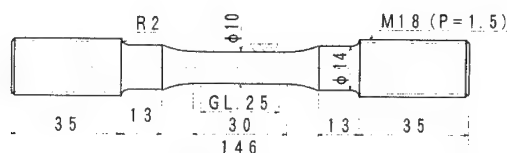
Specimen for low-cycle fatigue test (all dimensions in mm).
